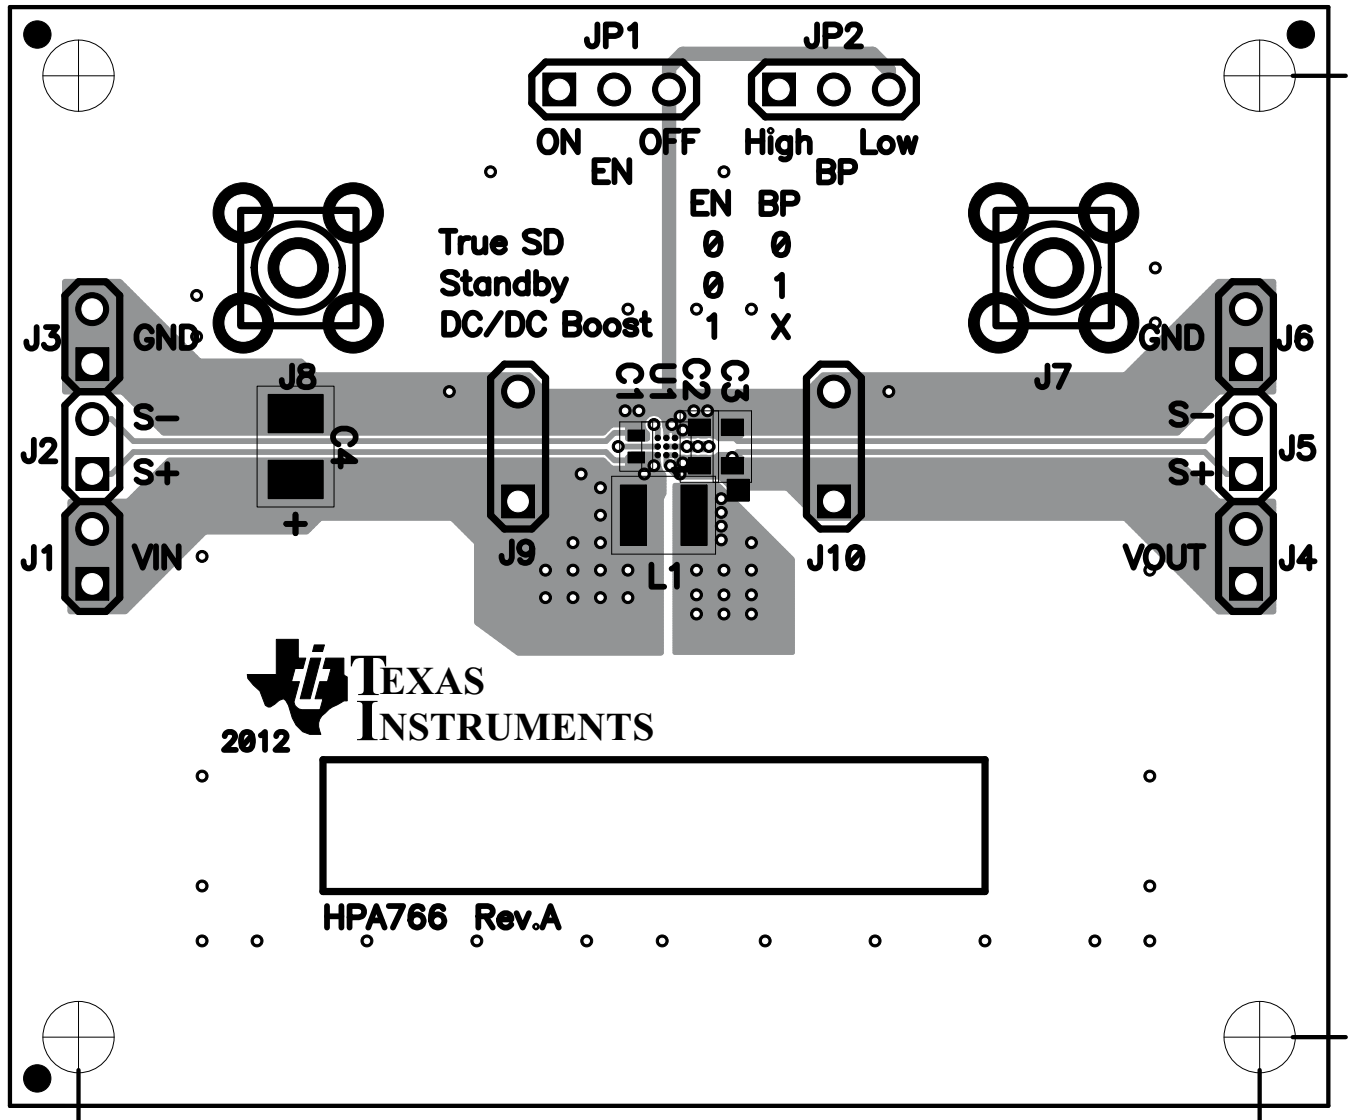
TPS6125xEVM-766 Component Placement (Viewed TOP)
